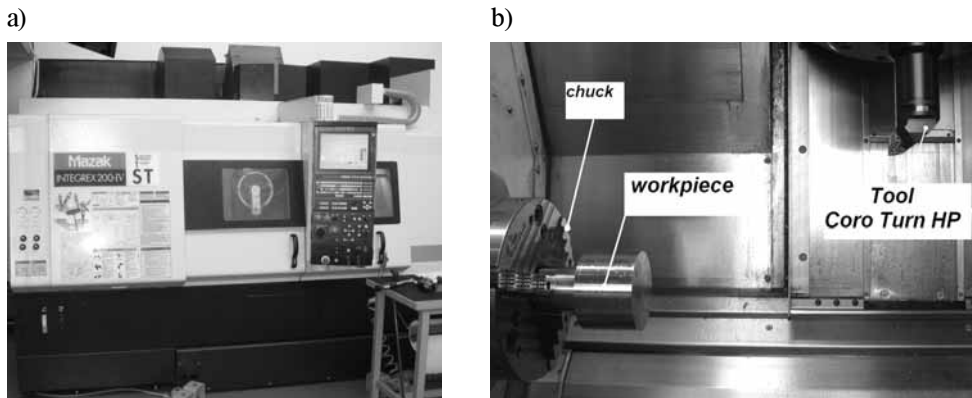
Working station: a) turning centre CNC Mazak Integrex 200 IV ST; b) cutting zone – general view
